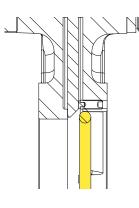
is a unidirectional valve utilizing three RTFE-tipped gate guides positioned on the upstream side of the gate surface to ensure optimum alignment with seating surface throughout the full valve stroke.
